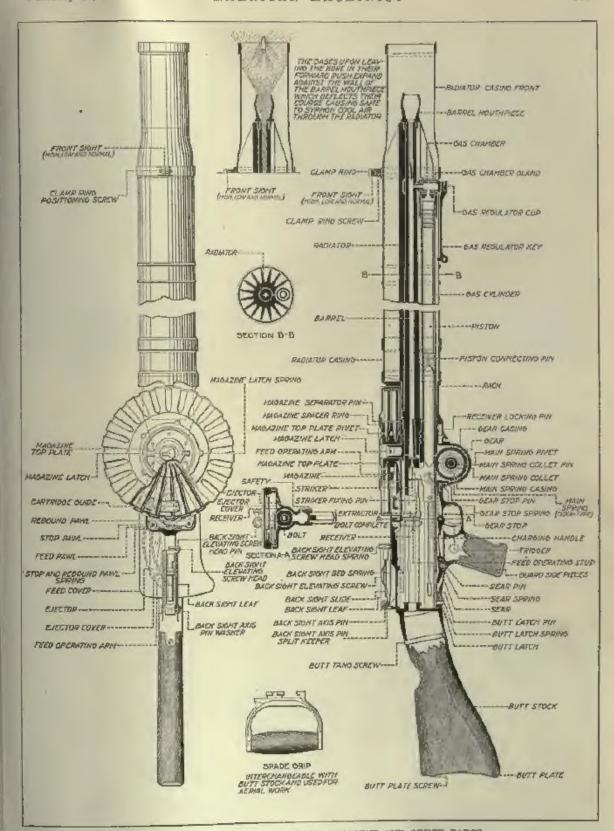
THE LEWIS GUN, SHOWING RECEIVER AND OTHER PARTS
